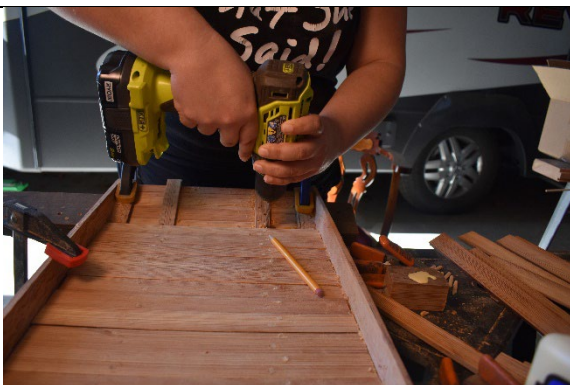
Saldivar drilling holes into the ramp stringers to add the interior ramp planking (Photo by Michaela Hoots).
